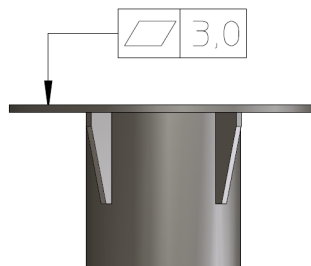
ADU mast flange, recommended flatness on the mast mount plateau
